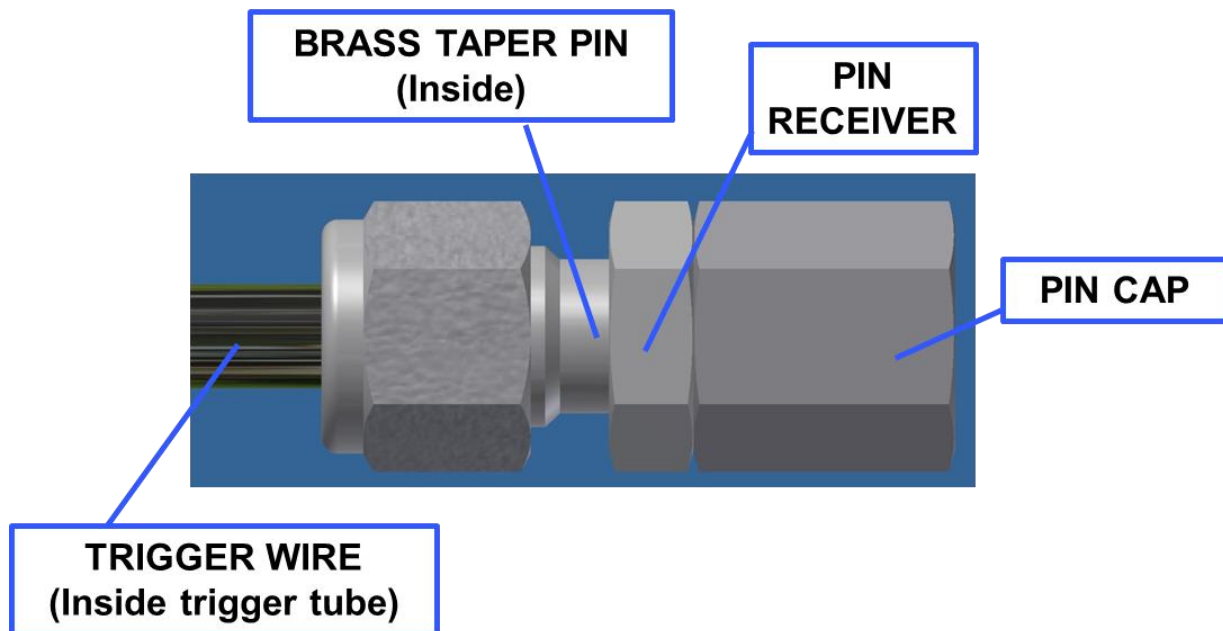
Improper trigger wire and pin assembly may cause the PRD to fail. PRDs in this condition may be repaired in the field, see text for details.
